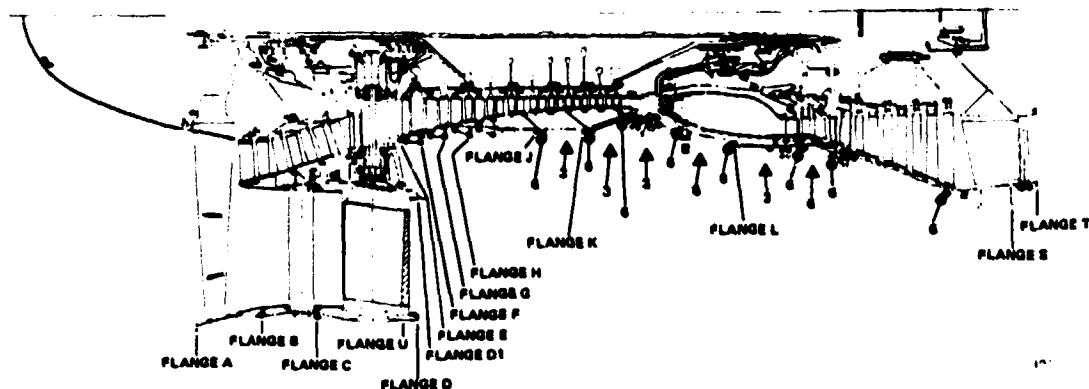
Configuration 1 with 72 Thermocouples on the Inboard (No. 3) Engine.
